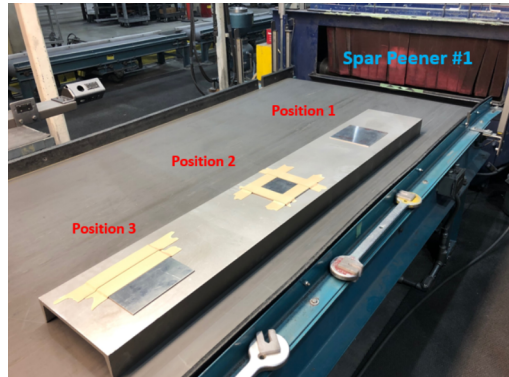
Double-sided tape attaches each sample to the holding fixture, which is carried through the machine on a belt. Rubber tape used for shot peen masking seen on the latter two samples.
